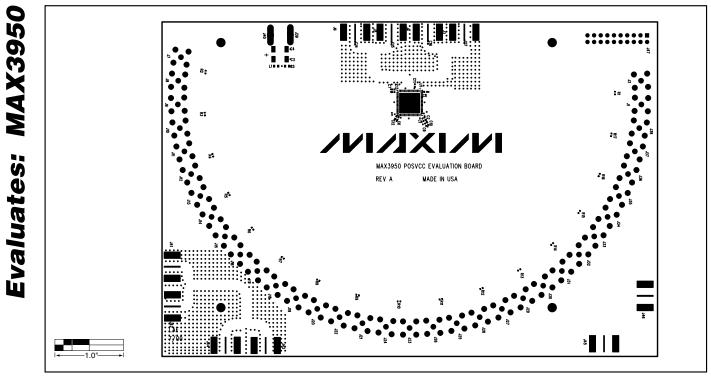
MAX3950 EV Kit Component Placement Guide—Component Side
